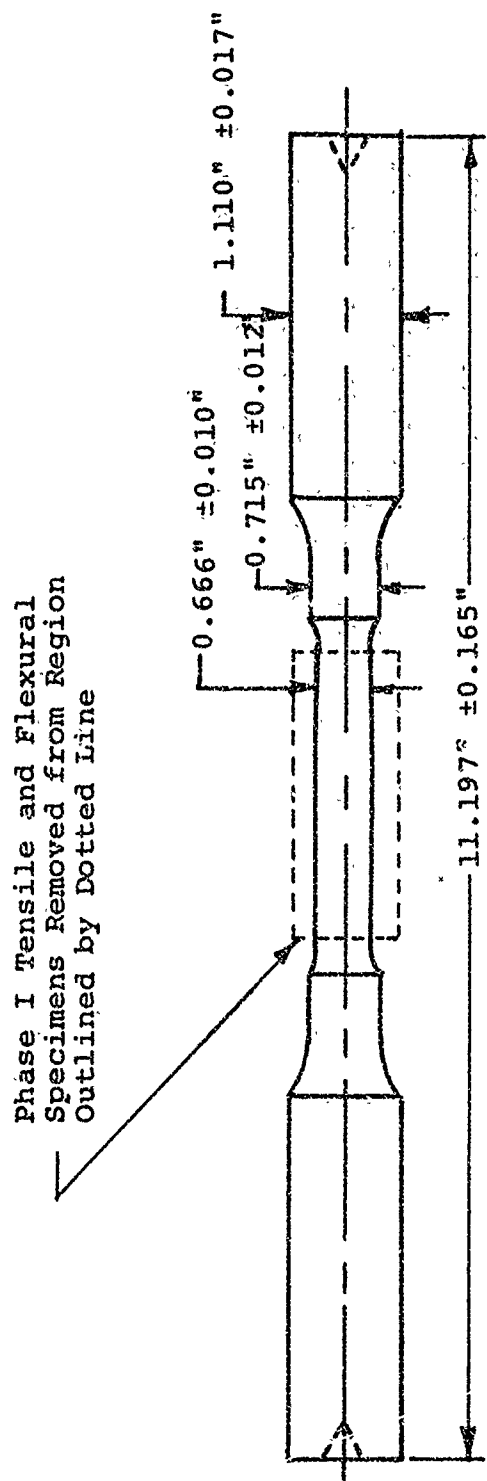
Configuration of Specimen Blanks 2A05 as Received from Coors and Cutting Plan for Removing Phase I Macro Tensile and Macro Flexural Specimens
